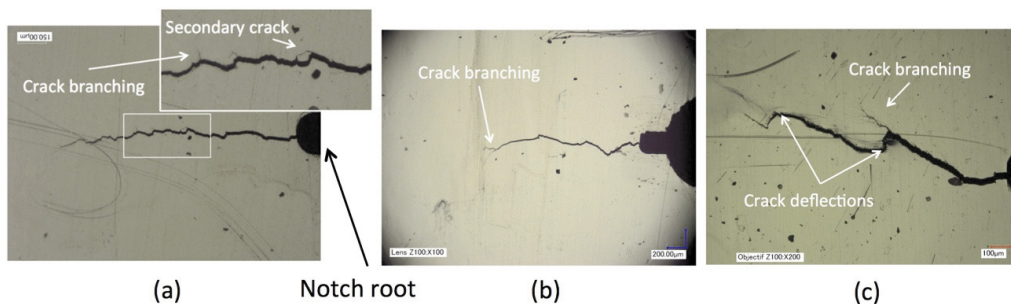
Partial view of crack branching, crack deflection and secondary crack for (a) base metal, (b) N90-Welded and (c) N60-Welded specimens (observations were made with a 0.1kN applied loading)
